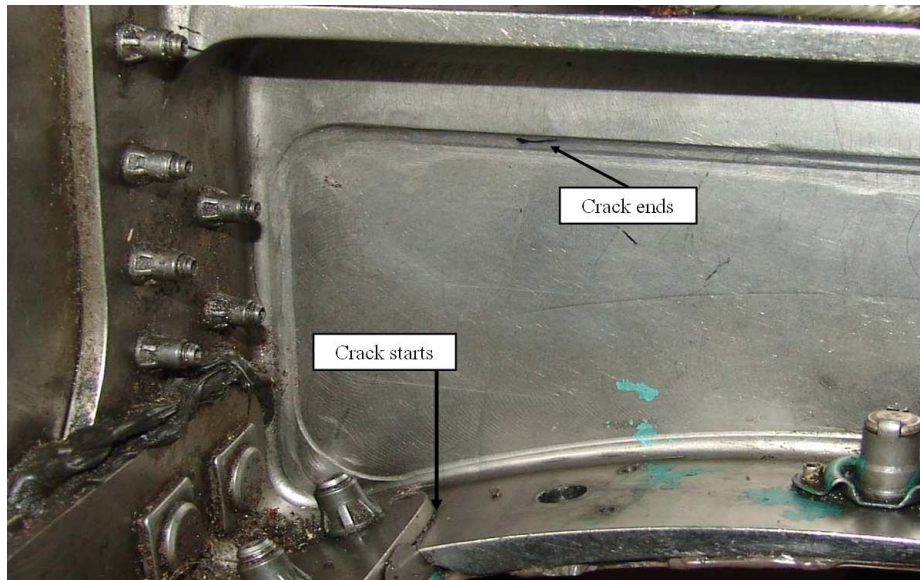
F-15 bulkhead: front view of cracked bulkhead section
